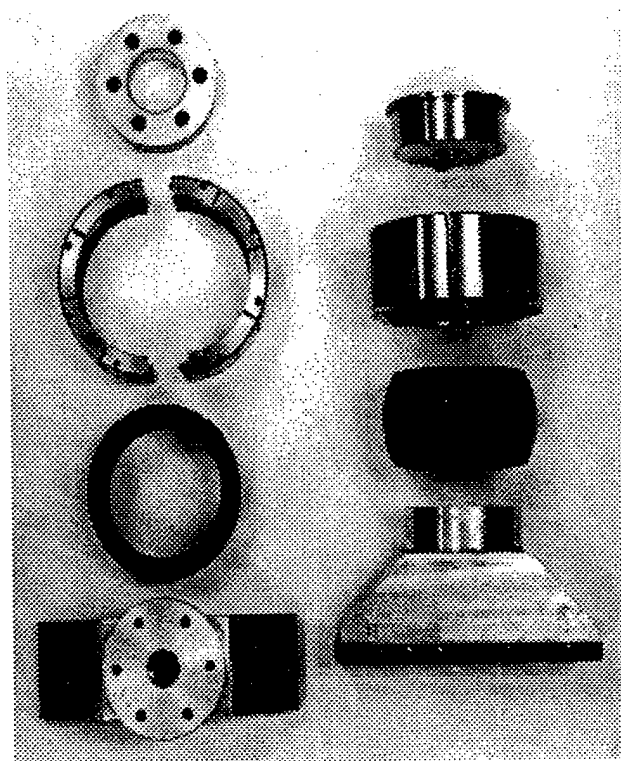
The aluminum end cap system. From the top are the multi-bolt adapter, bearing race, spherical bearing segment and the trapezoidal shaped end cap.
